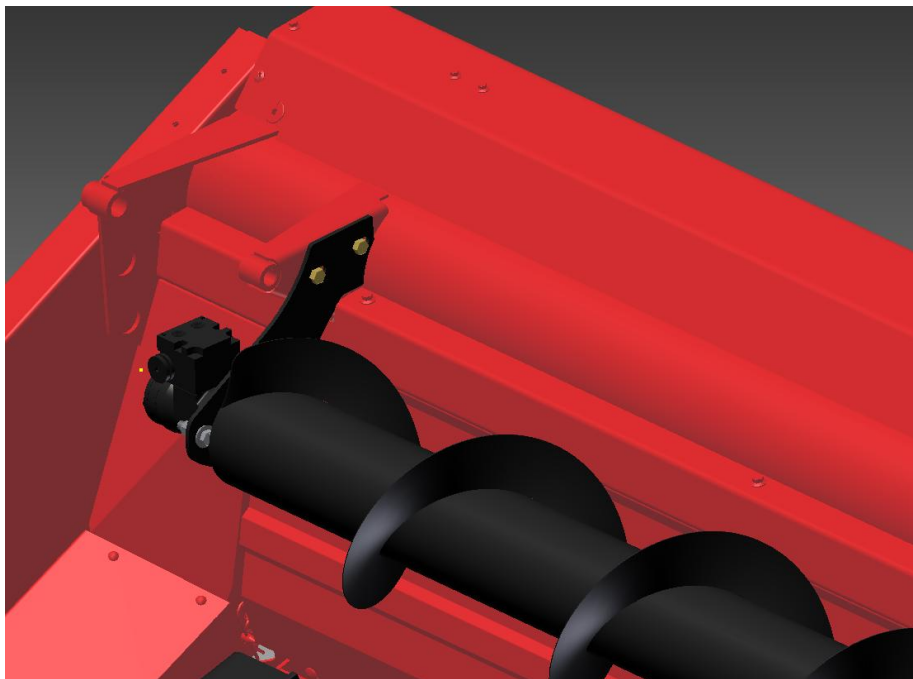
SHOWS RH END MOUNTED TO HEADER MOUNTS USING 1/2 X 1-1/2 BOLTS.
